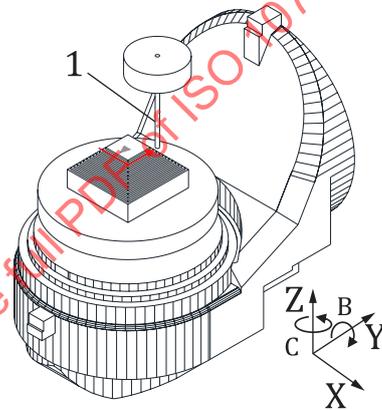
Example of a vertical five-axis machining centre with a tilting rotary table [w C' B' b X Y Z (C1) t]
